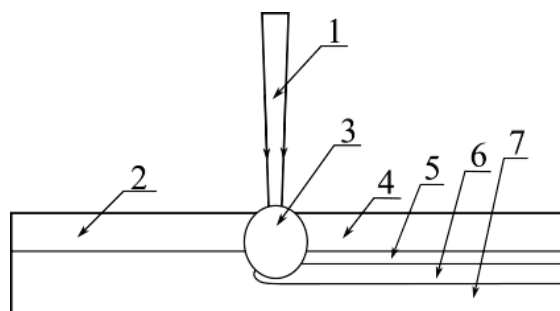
Scheme of laser cladding of powder: 1 – laser beam, 2 – layer of composite powder, 3 – weld pool, 4 – weld bead, 5 – fusion zone, 6 – heat-affected zone, 7 – substrate
